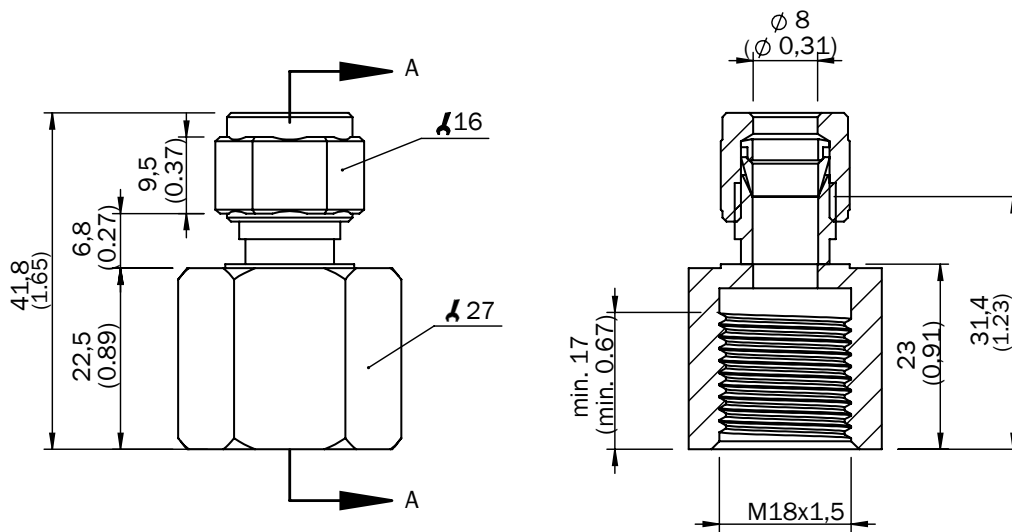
Dimensional drawing adapter M18 x 1.5 (p/n 2104208)
